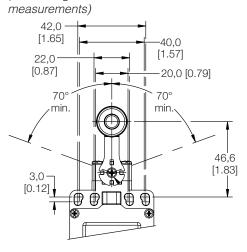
GXE Series Side Rotary Adjustable Dimensions mm [in] (refer to Figure 6 for additional measurements)
